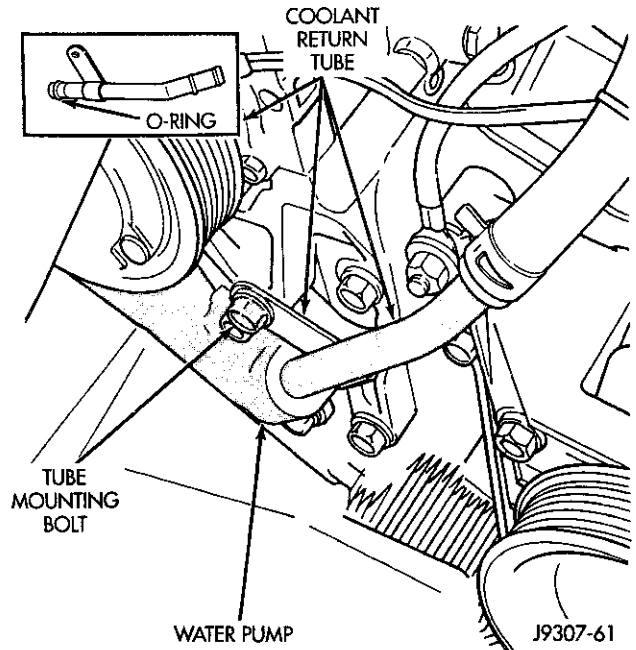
Coolant Return Tube—5.9L HDC-Gas Engine
